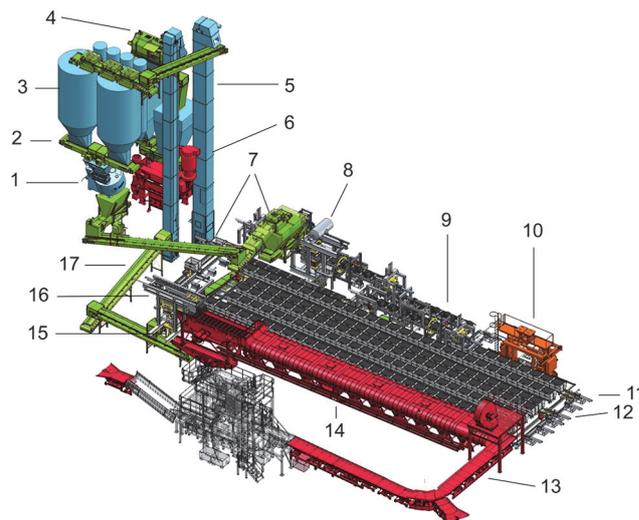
Complete overview of the new foundry plant: 1 – molding sand mixer; 2 – discharge and dosing belt conveyors; 3 – return sand silos; 4 – polygonal sieve; 5 – bucket elevator; 6 – return sand cooler; 7 – ready-to-use molding sand with sand silo above molding machine; 8 – seiatsu molding machine with mold line; 9 – separate upper and lower box line; 10 – (optional) automatic casting machine; 11 – cooling line; 12 – transfer trolley with pusher unit; 13 – sorting and transfer channel; 14 – casting cooler; 15 – discharge channel; 16 – ejector; 17 – return sand transport system
